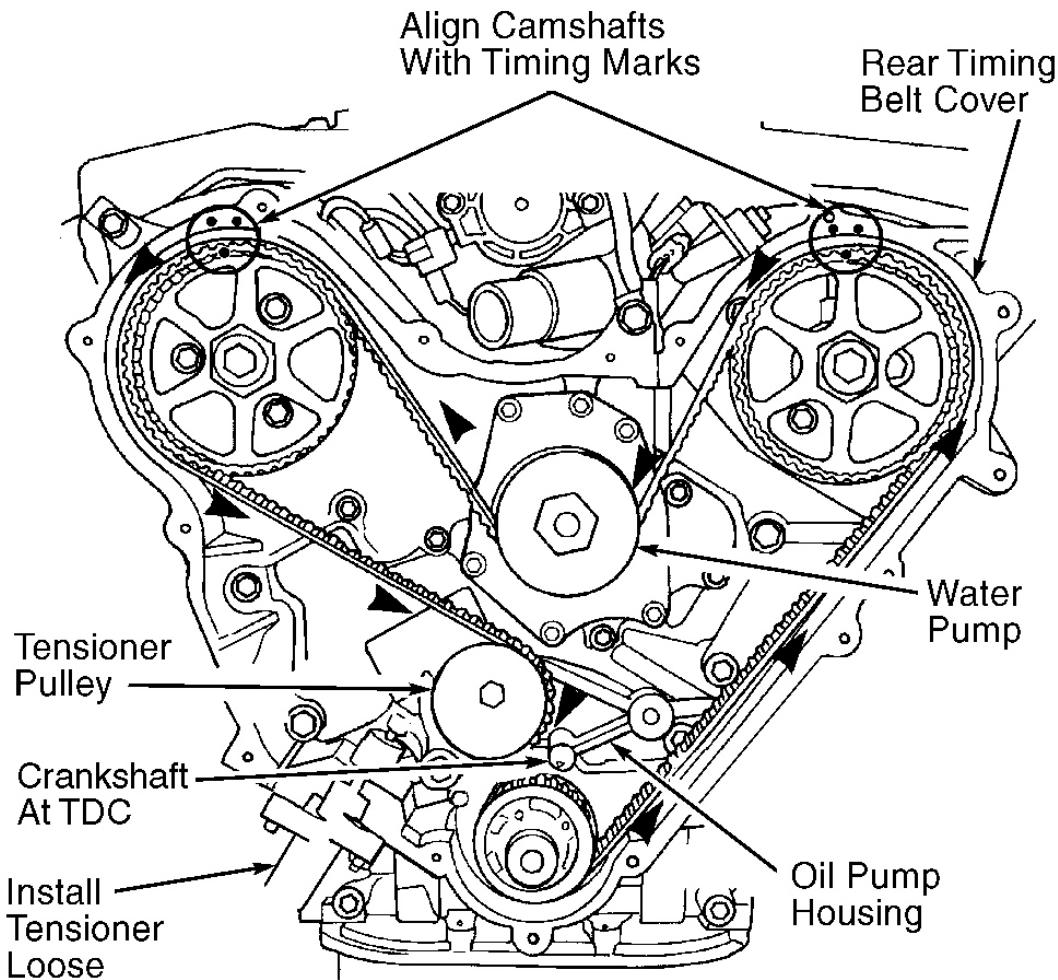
Exploded View Of Timing Belt & Components (2000 & Up)
